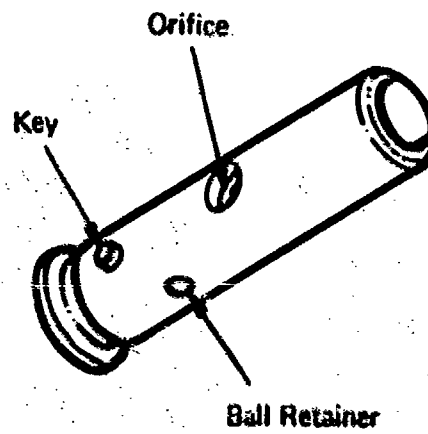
CARTRIDGE HOLDER AND THROTTLE BODY
